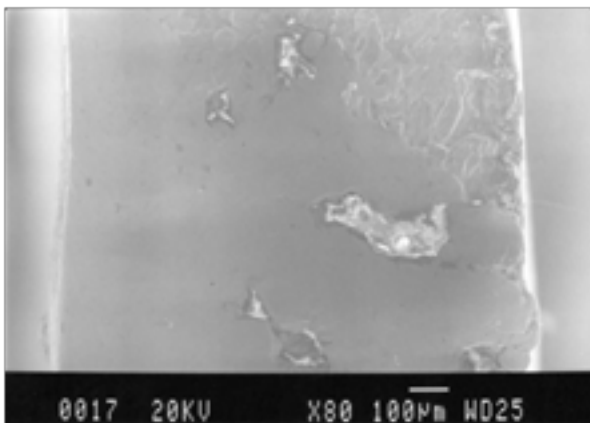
Electronic microscope scanning revealed that the transverse crack was a fatigue fracture with a smooth, burnished surface.
